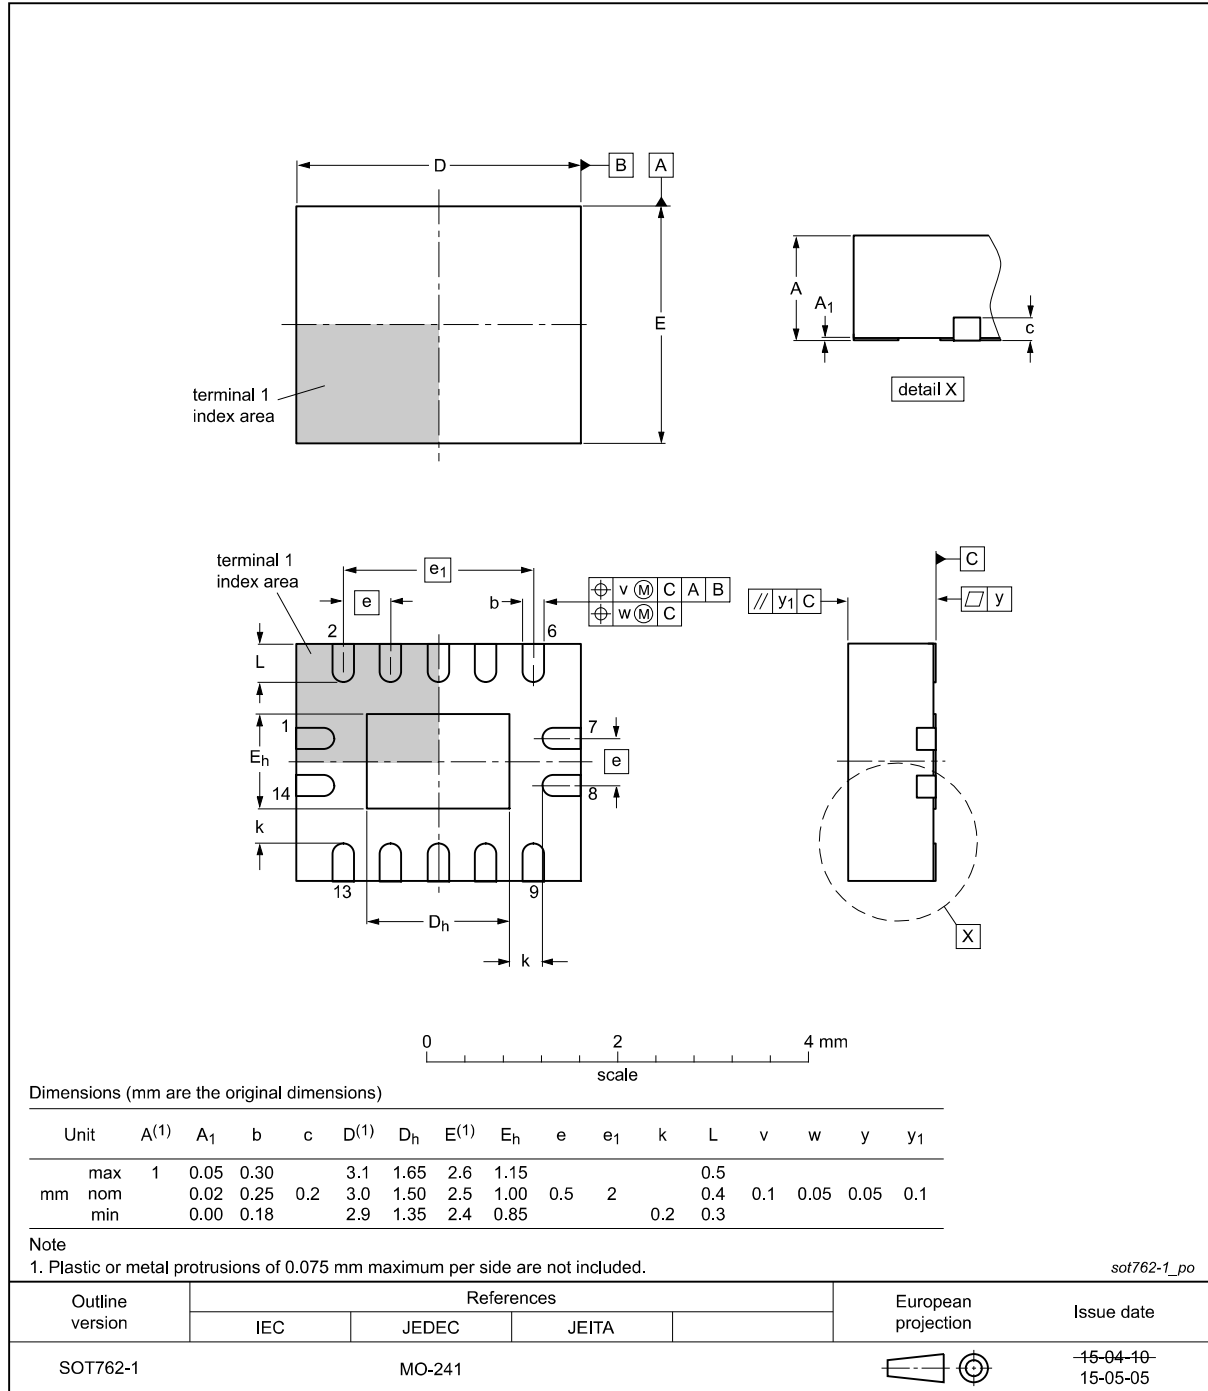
Package outline SOT762-1 (DHVQFN14)
